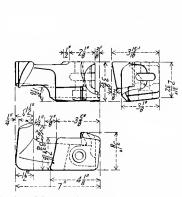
Lock for Major Coupler. Buckeye Steel Castings Company.
